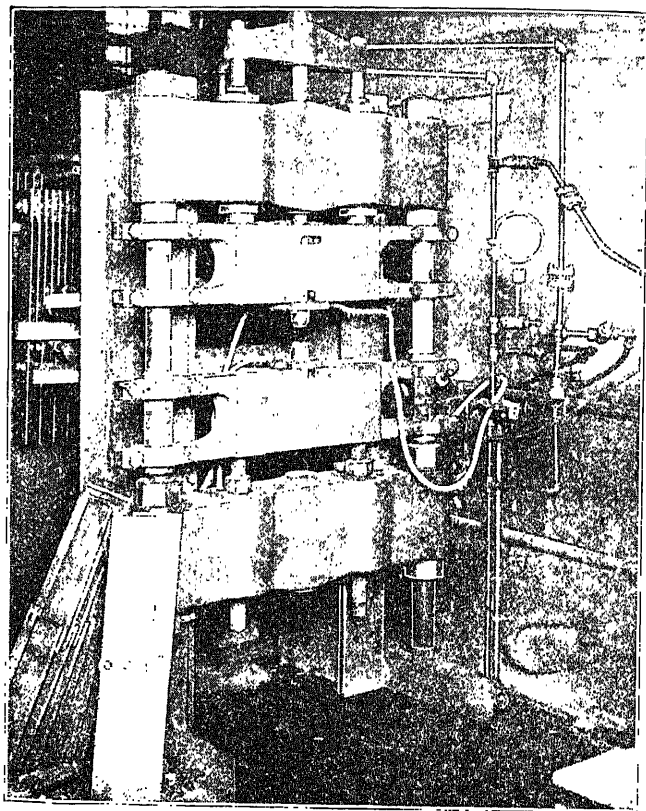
General Electric Co.'s Experimental Spot-Welding Machine. Current Capacity 100,000 Amp. Pressure Capacity 36 Tons. Has Welded Three Plates, Each 1 In. Thick.
